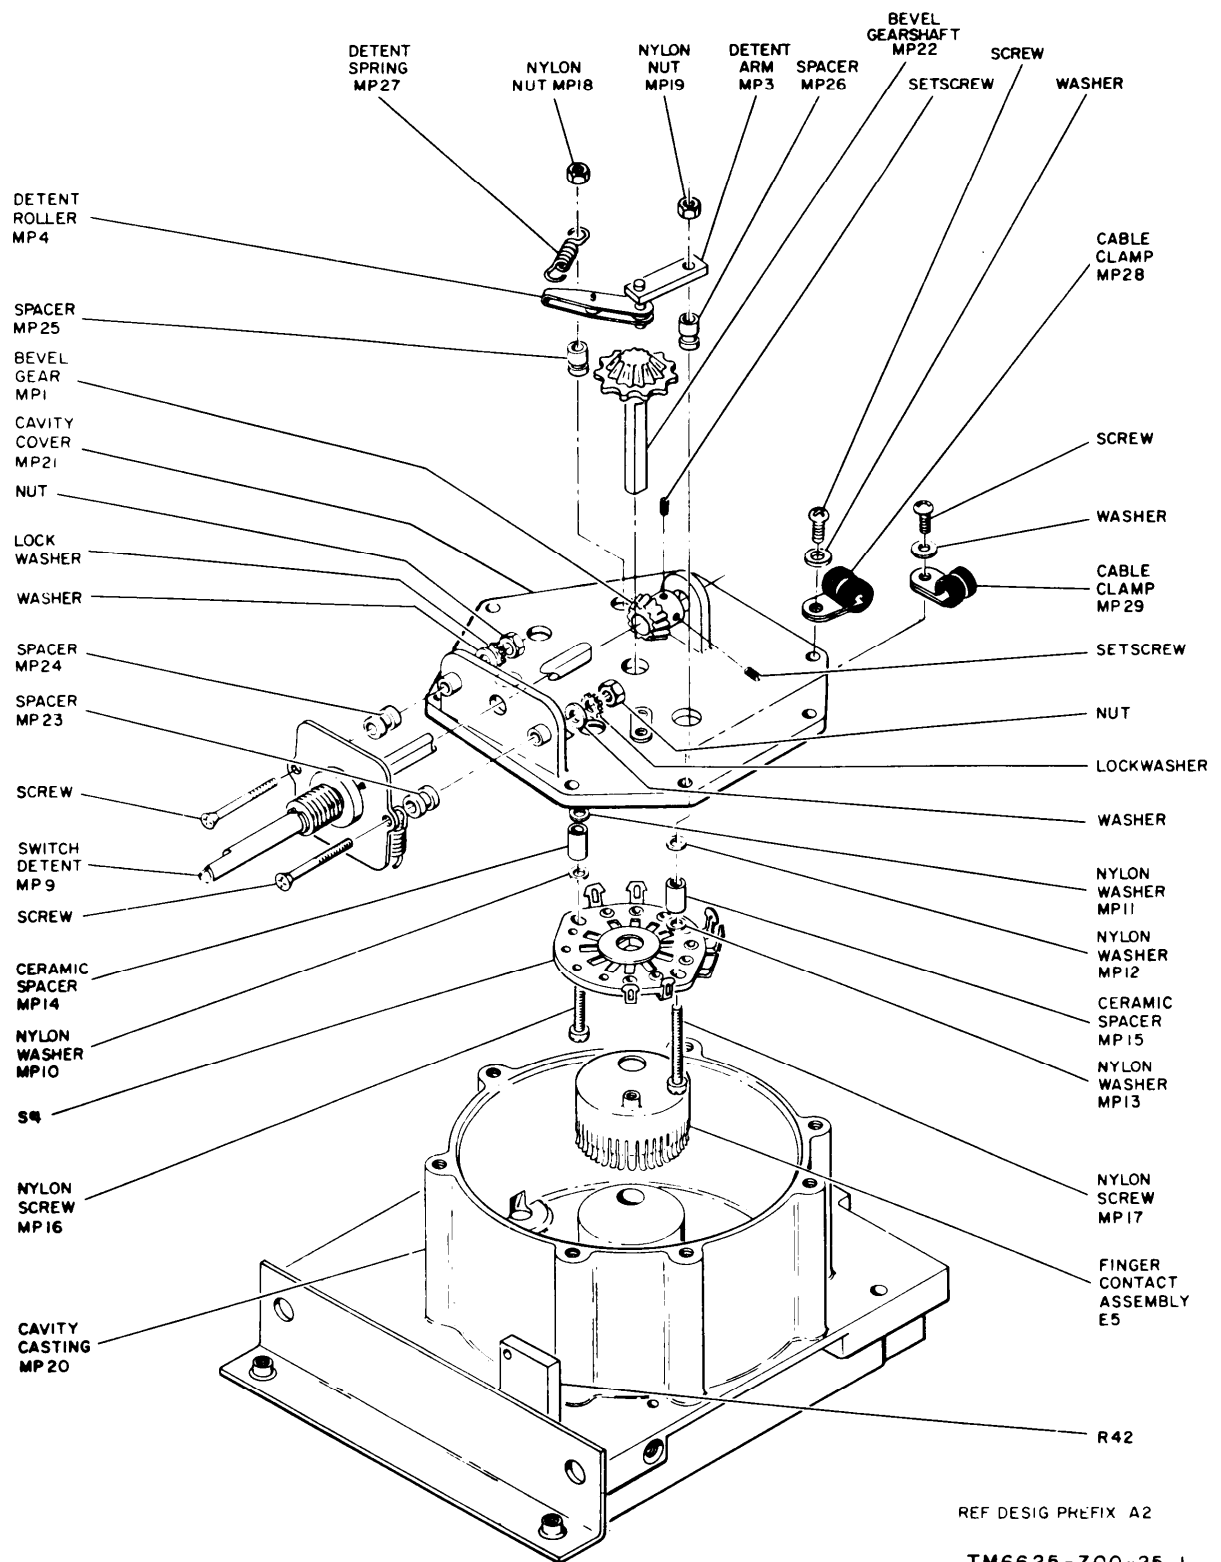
Electronic Frequency Converter A2 Exploded View, Front and Rear Chassis Separated
